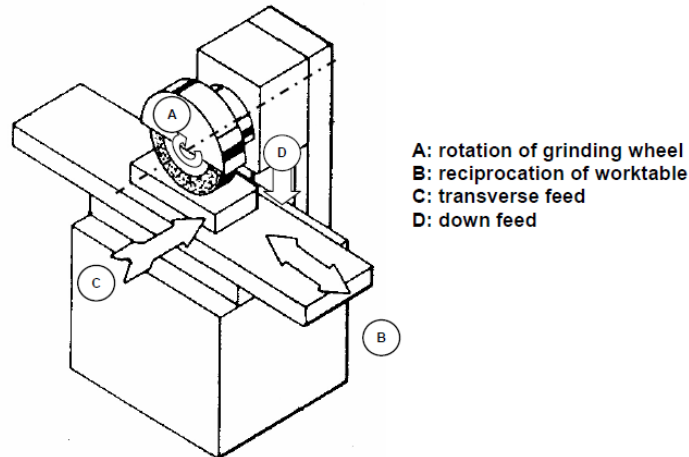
Horizontal spindle reciprocating table surface grinder
